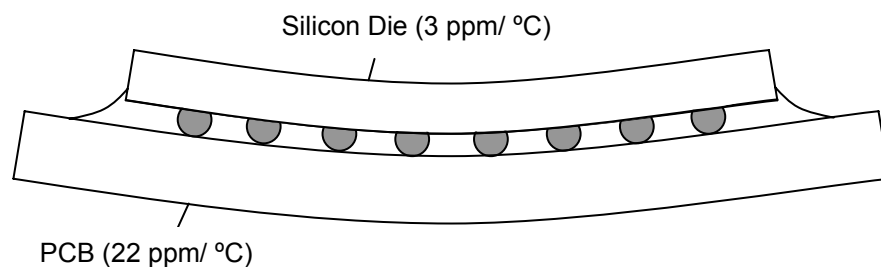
Bending of a flip chip assembly caused by CTE mismatch between Printed Circuit Board (PCB) and Silicon Die
